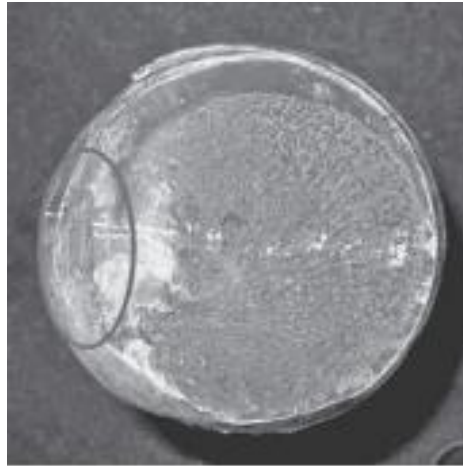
Fracture surface on broken part of shaft [9]
